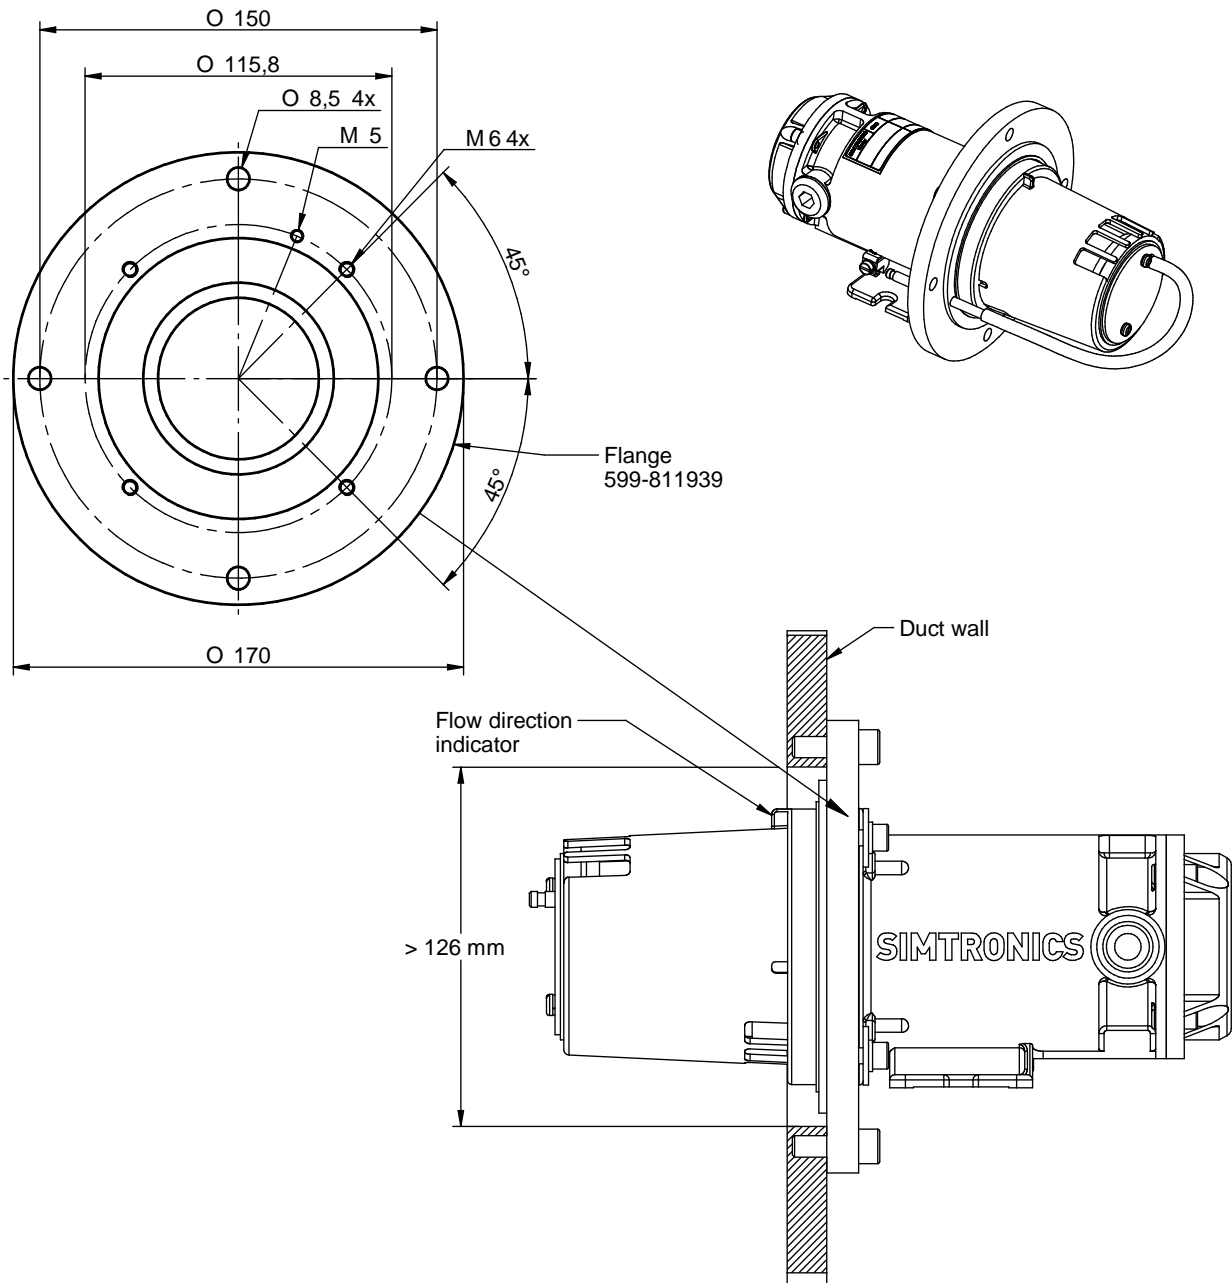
Ventilation duct or pipe mounting using Duct Mounting Flange Kit
